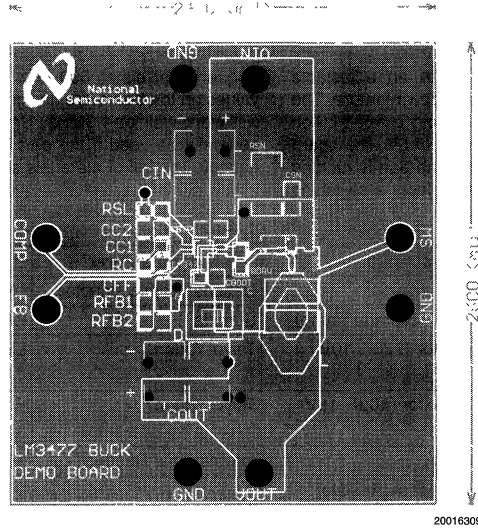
LM3477 Evaluation Board PCB Layout (Top Side)
